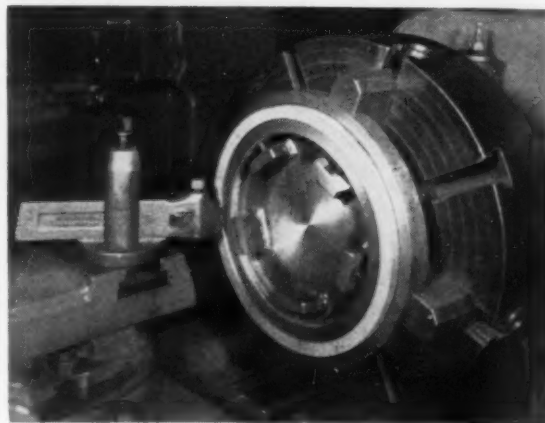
Tool life machinability tests on gray-iron rings closely simulated commercial machining.
